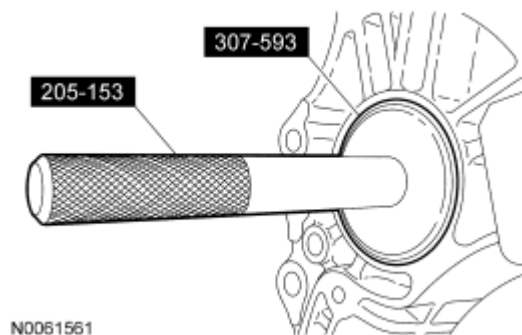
Identifying Differential Fluid Seal & Special Tools (307-593, 205-153)
